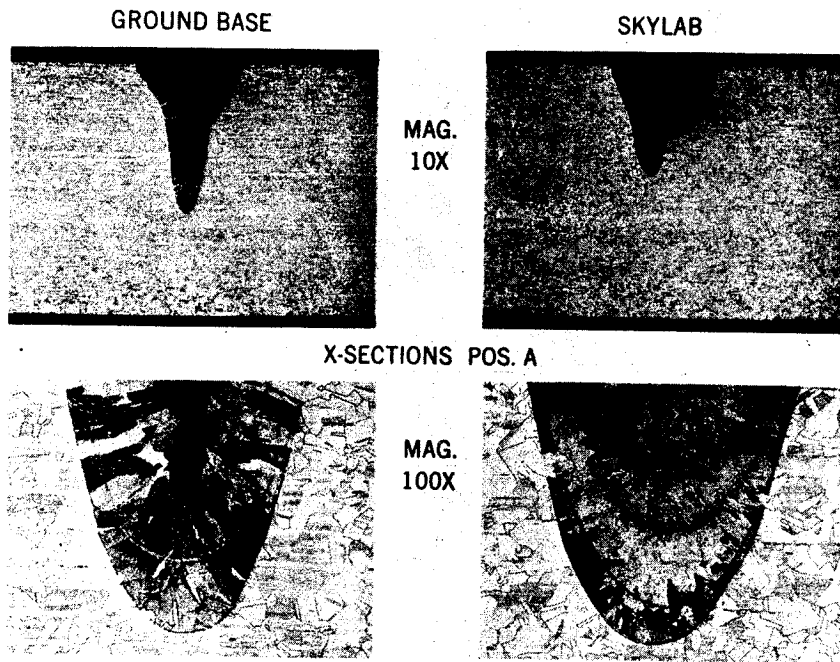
GROUND BASE & SKYLAB EB WELDS IN 304 STAINLESS STEEL
